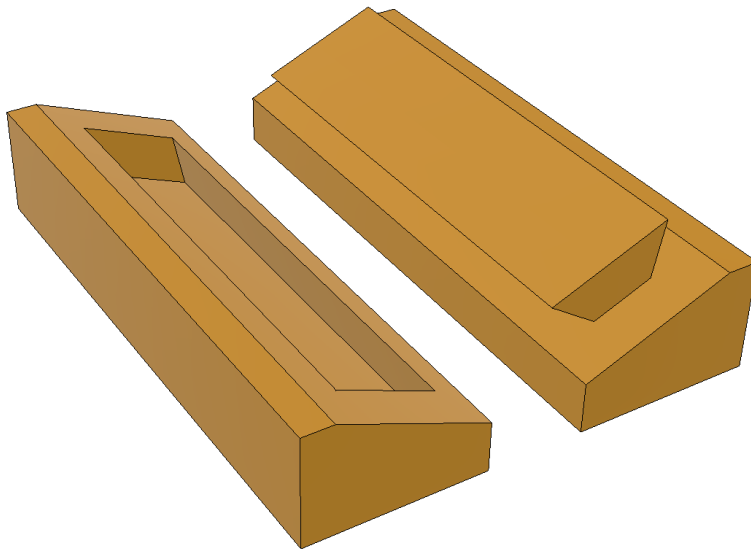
Slat connector with horizontal slat, which forms 45° when assembled
